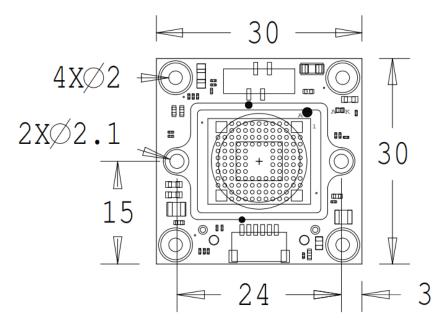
Front View of e-CAM56_CUOAGX Camera Mechanical Dimensions
